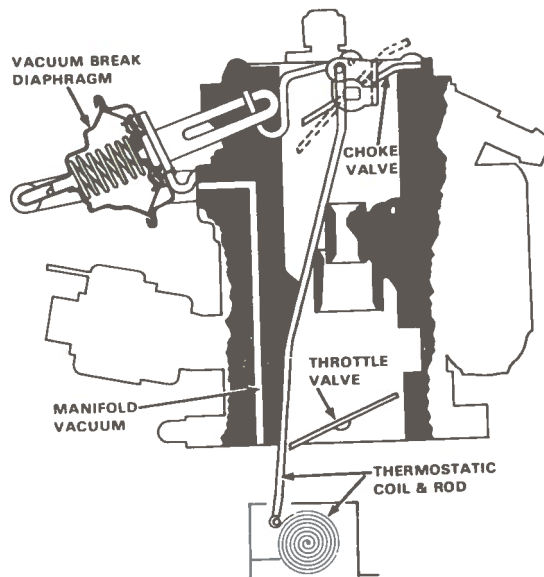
TYPICAL CARBURETOR CHOKE SYSTEM
